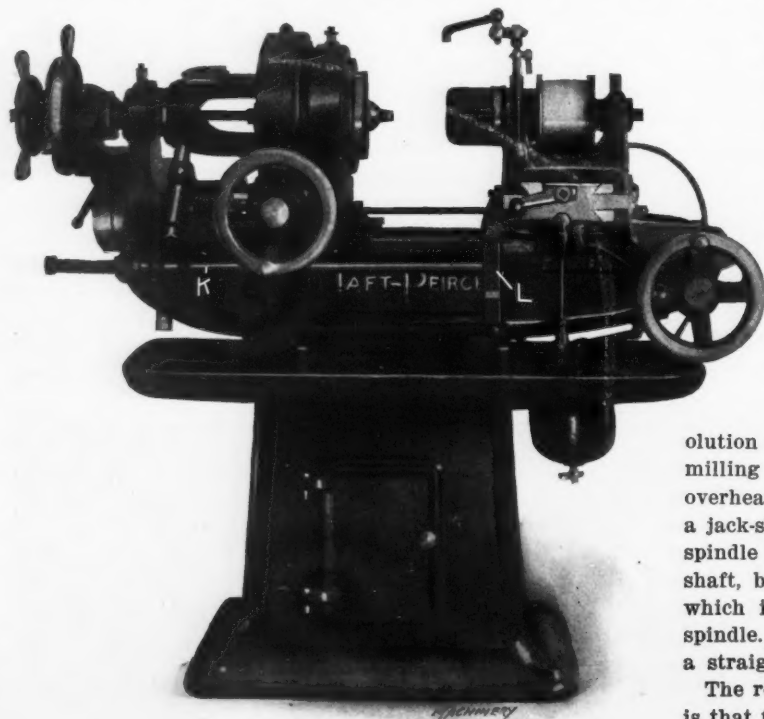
Archdale Thread Milling Machine built by the Taft-Peirce Mfg. Co.
